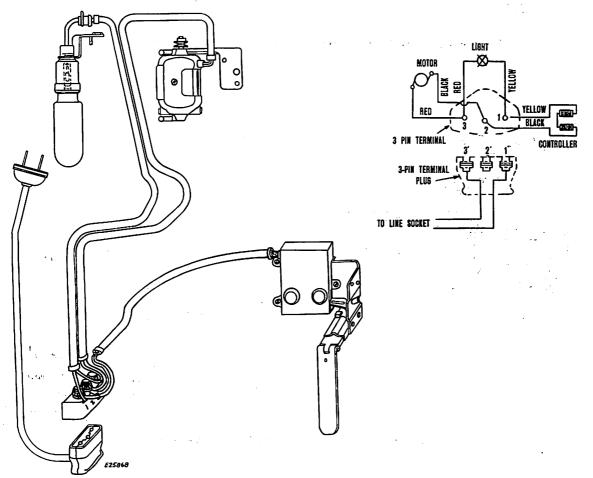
Wiring Diagram for BU103L Motor on 24-69 Machine in Cabinet Sets Nos. 40 and 47
